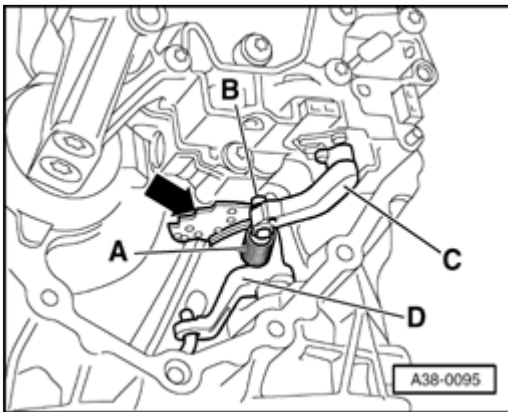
Identifying Catch Of Selector Shaft, Spring & Roller
